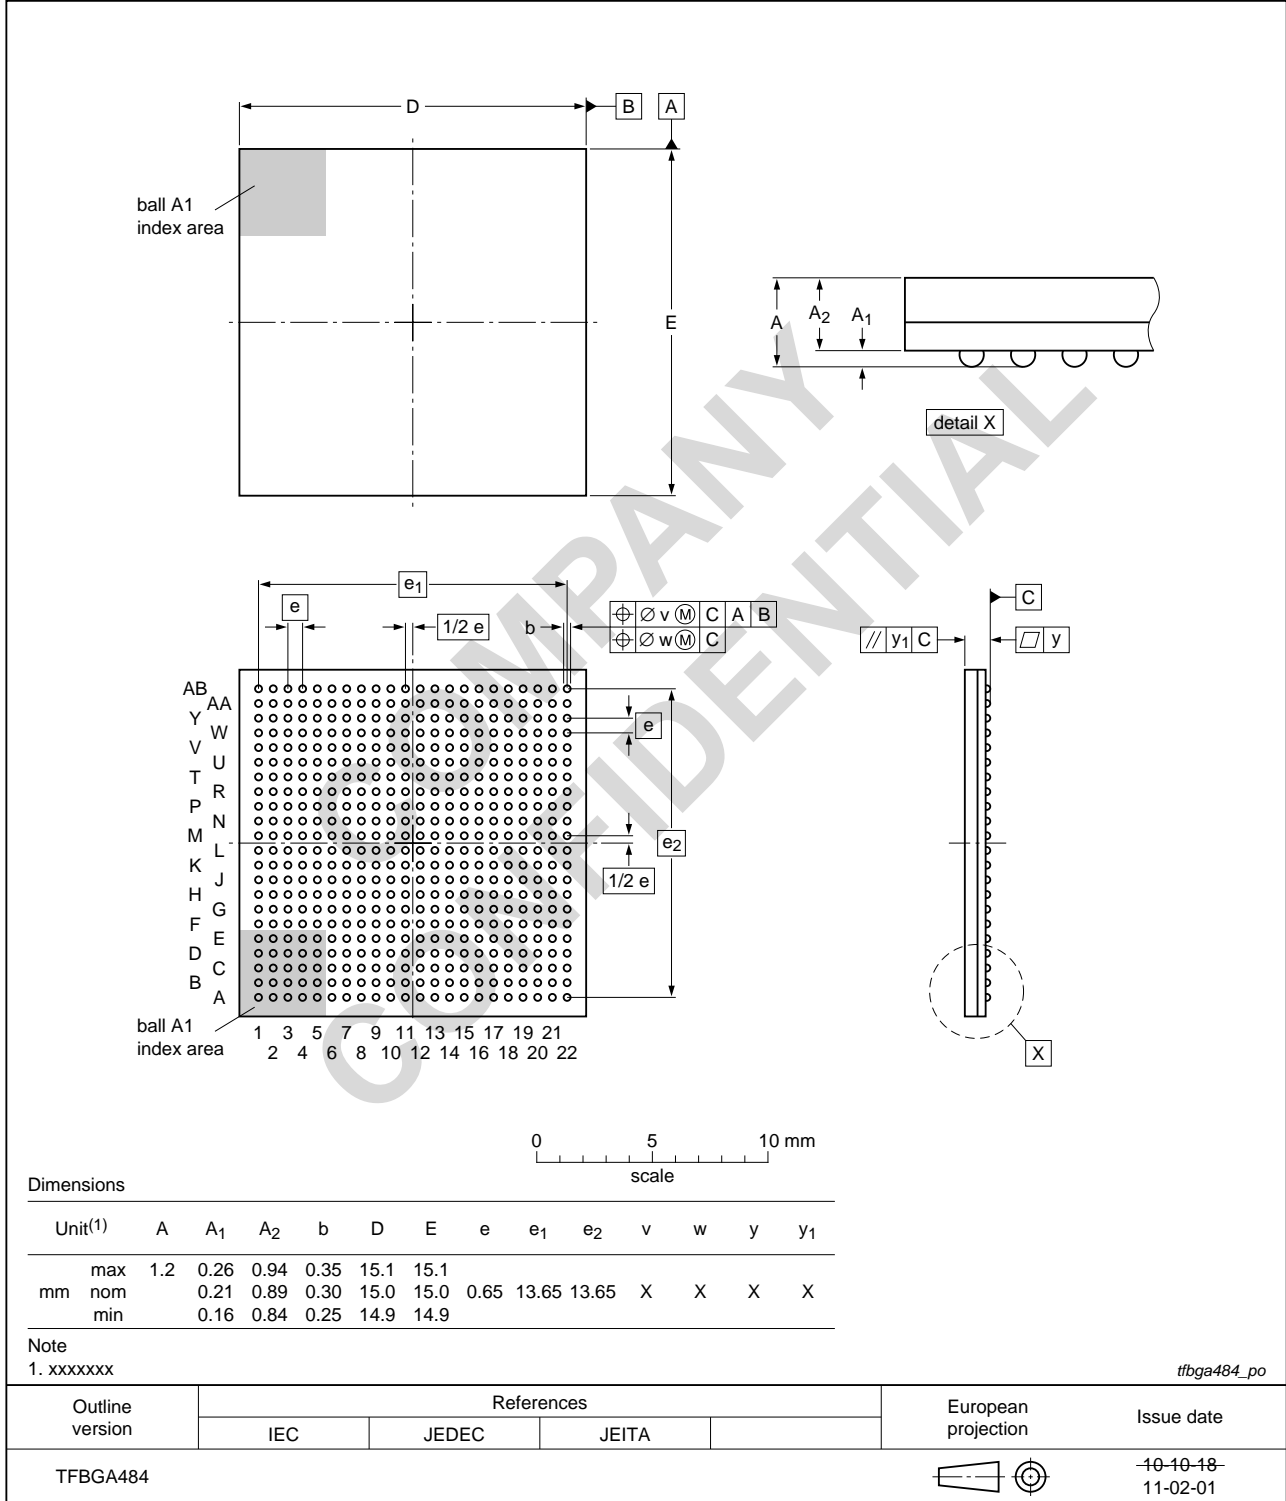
ASC8848/49/50/51 SoC TFBGA-484 Package Physical Dimension
